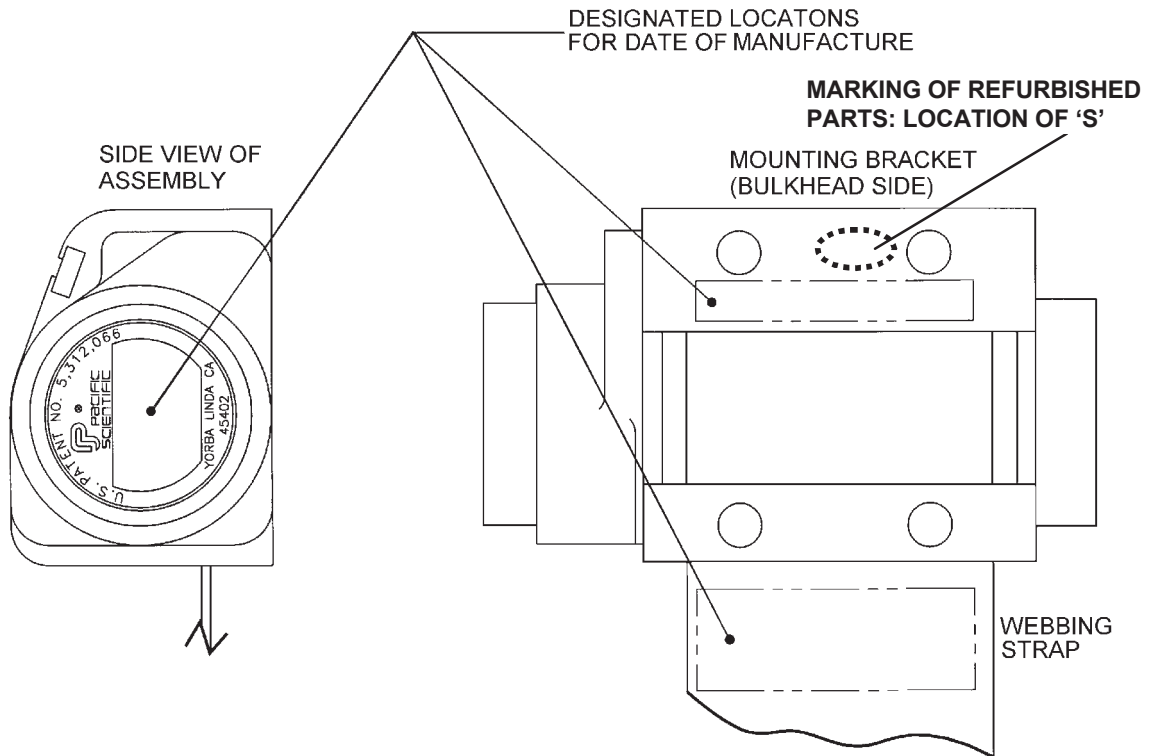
Location of Manufacturer's Date and Marking of Refurbished Parts
